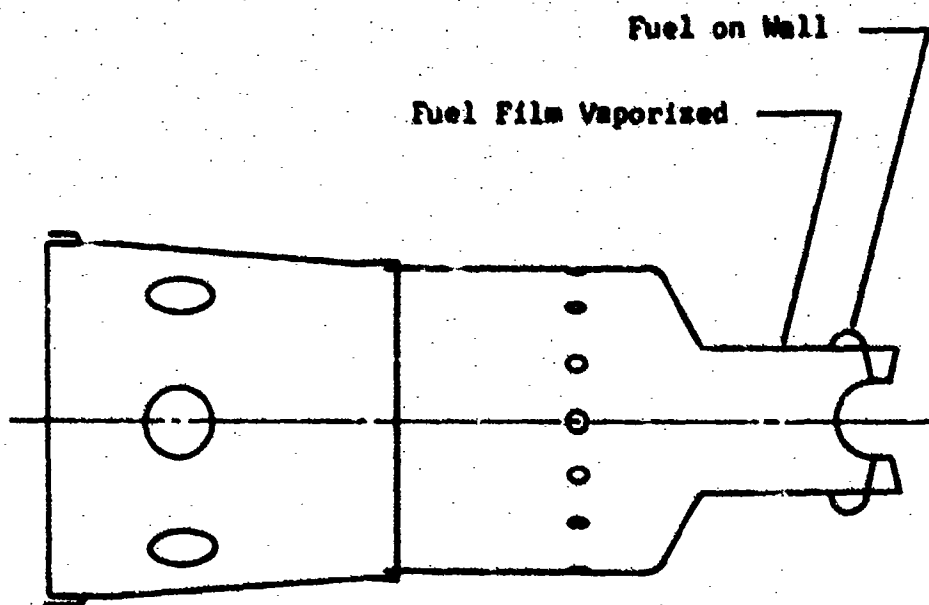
Prechamber, Extended-Length Preliminary Combustor Liner.
